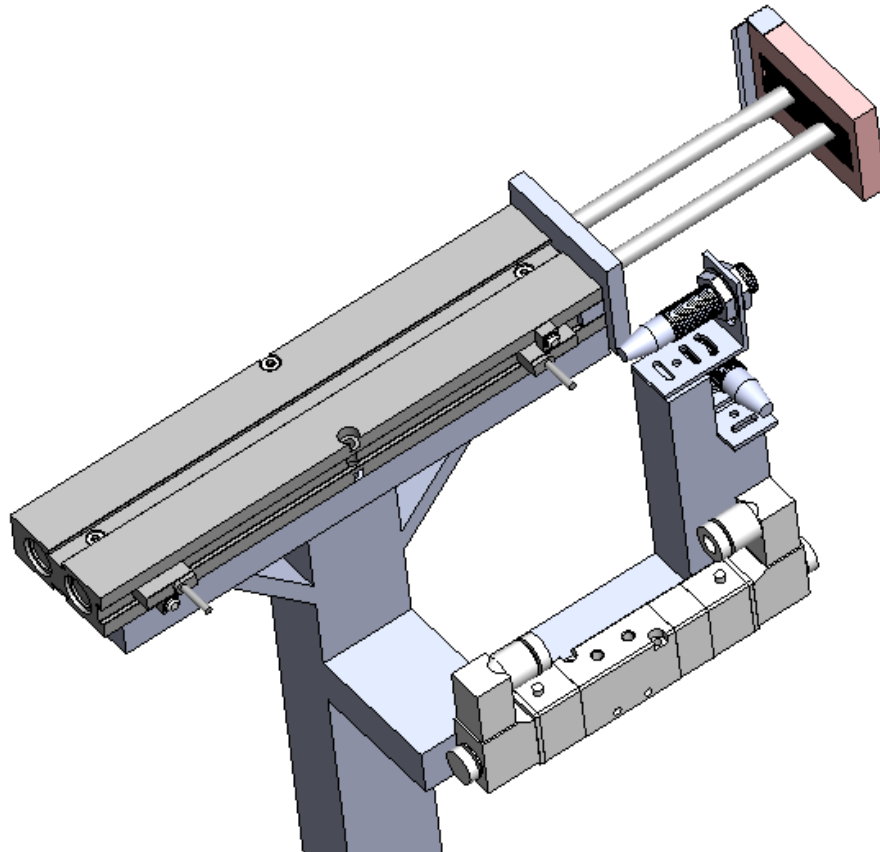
Design of PE wrapping film holding and cutting mechanism
